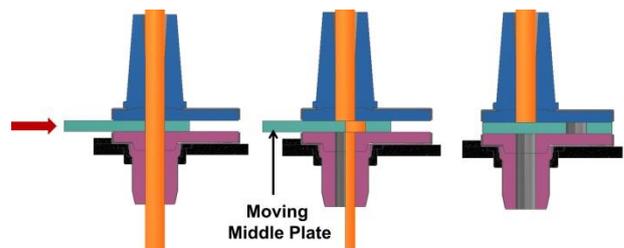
Schematic drawing of a sliding gate valve with three refractory plates
